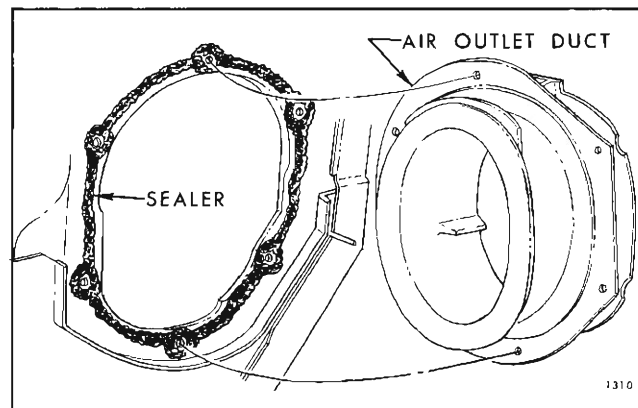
C17—Shroud Side Air Outlet Duct Sealing
